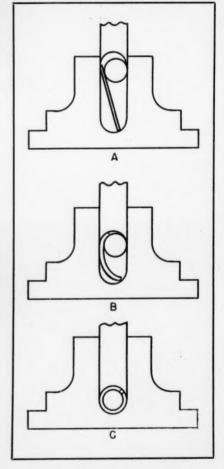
Sketch showing use of unique forming die in producing spacer tube of the type shown in Fig. 2
